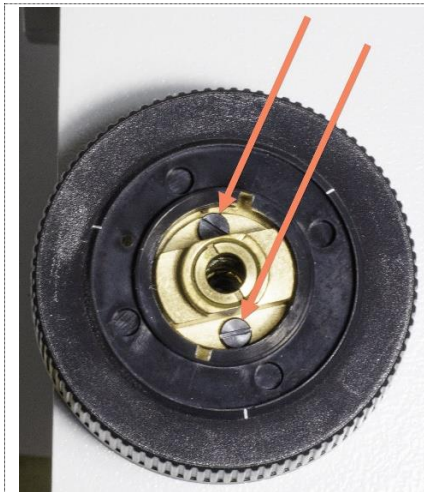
The right coarse focus knob after the fine focus knobs have been removed. The arrows point to the screws that attach the right coarse focus knob to the focus mechanism.
